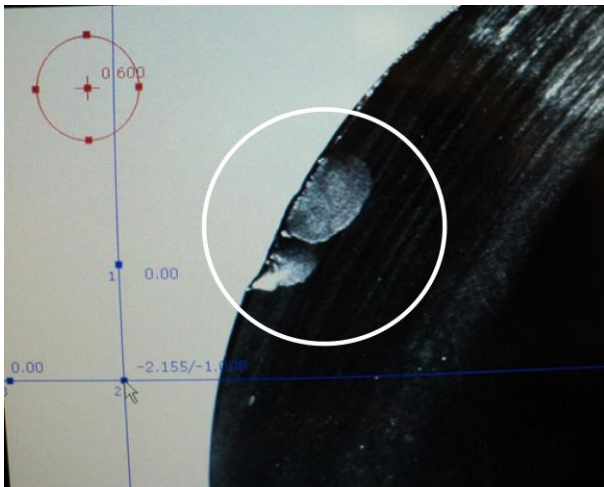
Cutting edge breakage on the ball-end mill cutter after milling graded material
